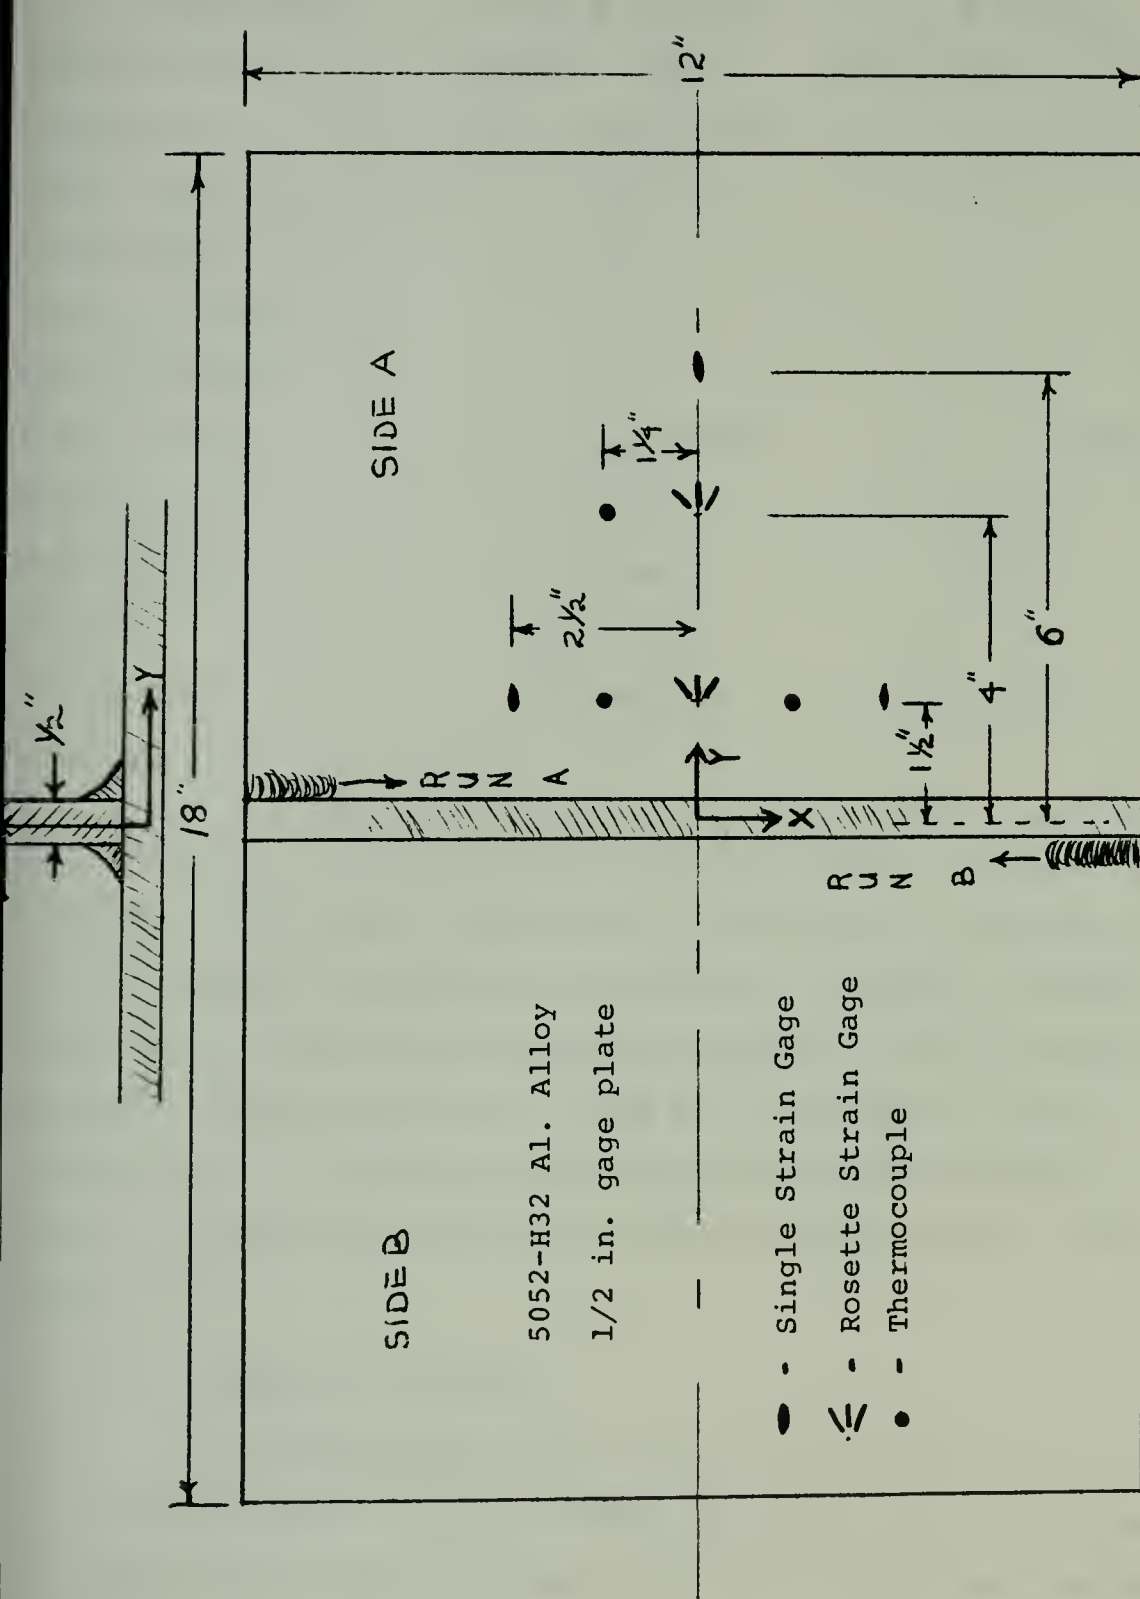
TEST PLATE LAYOUT
